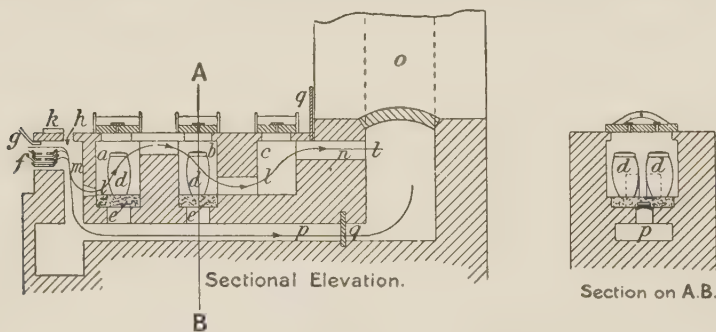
Nobel Liquid Fuel Crucible Furnace.
